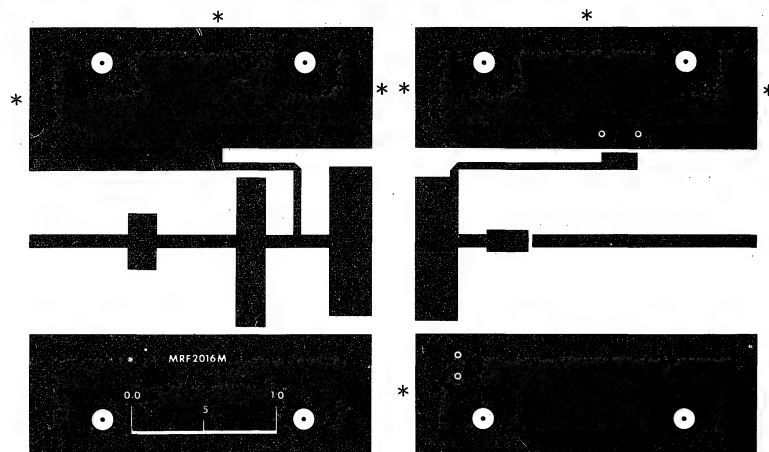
PRINTED CIRCUIT BOARD LAYOUT — 2 GHz TEST CIRCUIT
